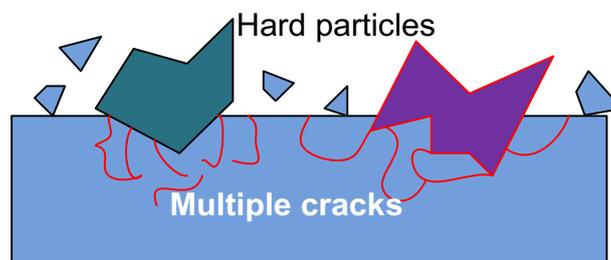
Schematic of material removal mechanism of abrasive jet machining
